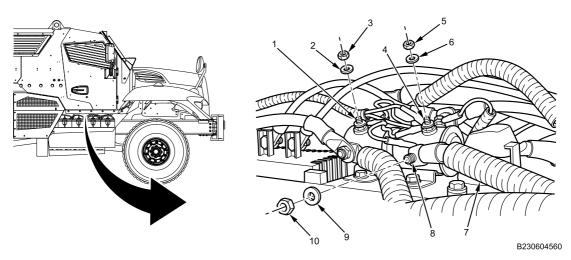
12V to 24V Disconnect Battery Switch Solenoid Feed Harness Fastener Removal.
